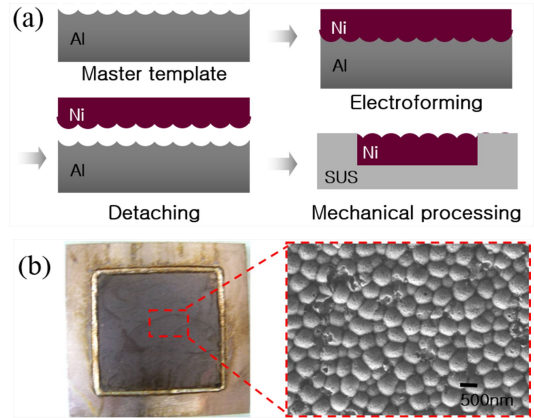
(a) NE process for fabricating a mold core with nano CVA structure and (b) fabricated mold core
